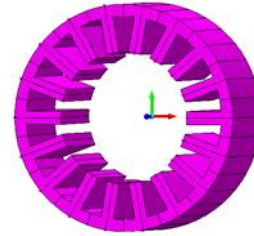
Stator material Carpenter: Silicon Steel and winding copper
